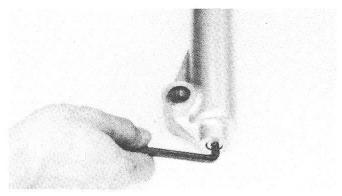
Removing the Allen head damper rod bolt (a special tool or an air wrench may be required to remove the bolt if the damper rod turns) (Sec 5)
